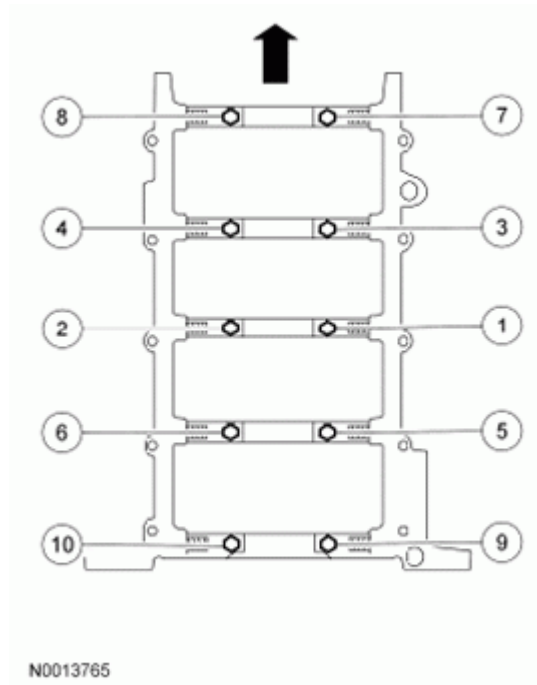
Identifying Tightening Sequence Of Main Bearing Cap Bolts
